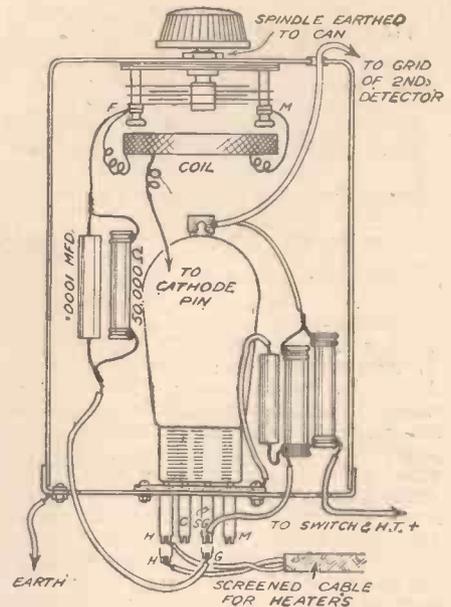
Proposed method of mounting valve and components inside a coil-screening can.
